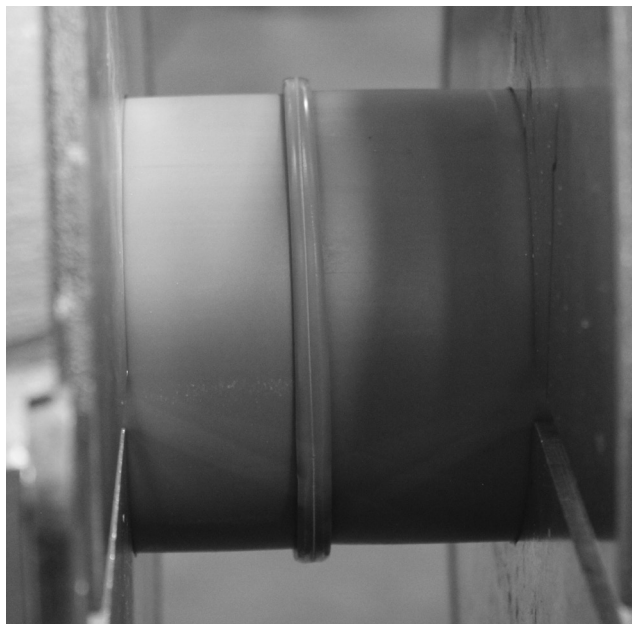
Check to see that a uniform double bead has been formed and rolled over; this indicates a successful welding.
